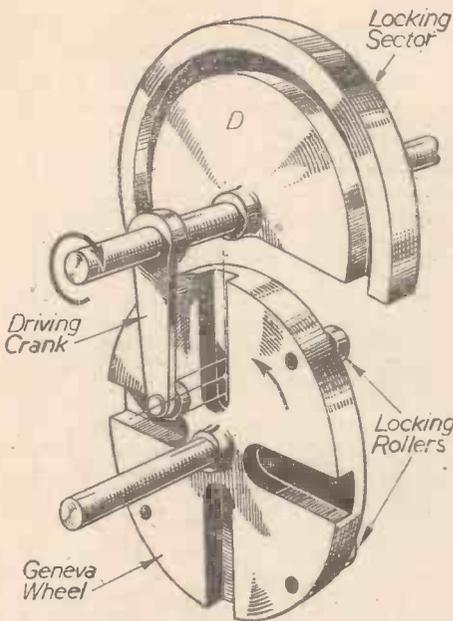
Exploded diagram of a compact form of Geneva mechanism.
